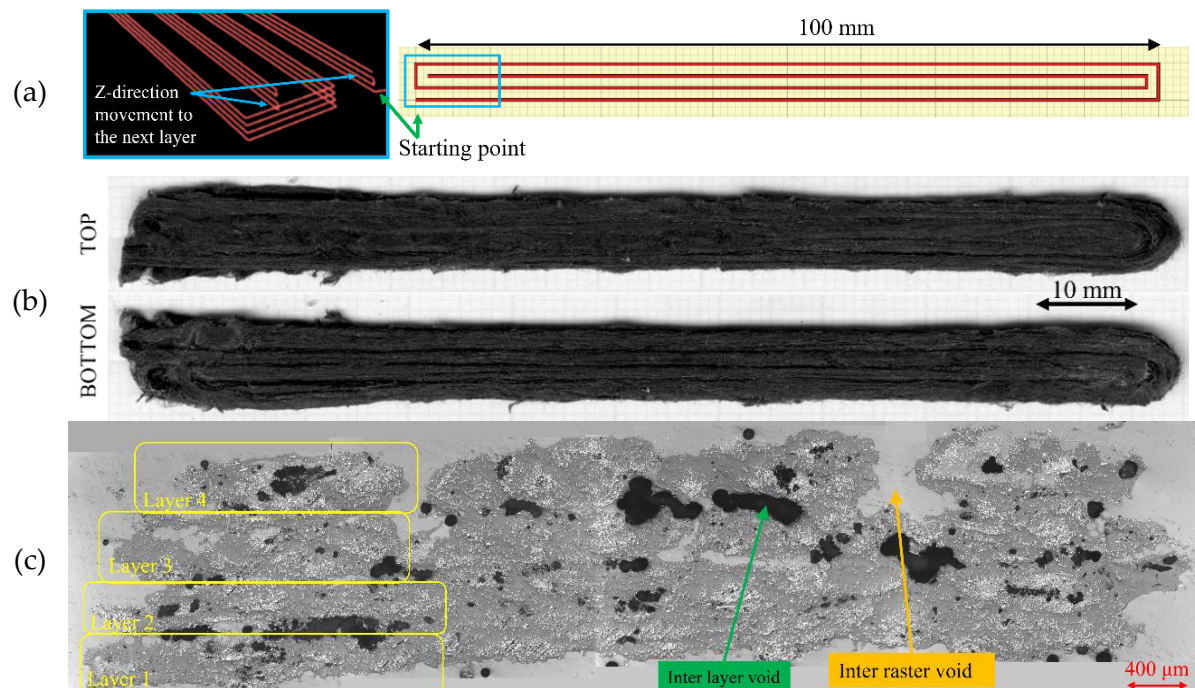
(a) Printing path for 4-layer stacking tensile specimen; (b) top and bottom surface of an as-printed 100-mm-long tensile specimen; (c) cross-section of the printed part showing four layers with four adjacent rasters on each layer.
